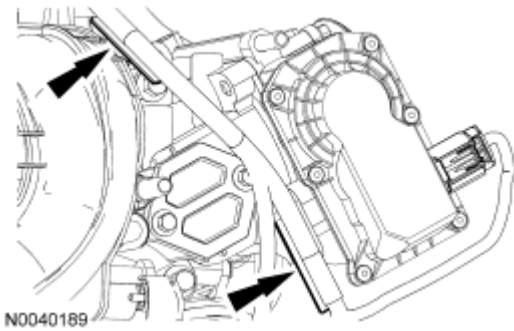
Locating Wiring Harness Pin-Type Retainers From Intake Manifold
